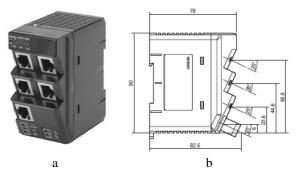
Ethernet Switch - W4S1-05B: *a* – model; *b* – overall and mounting dimensions.
